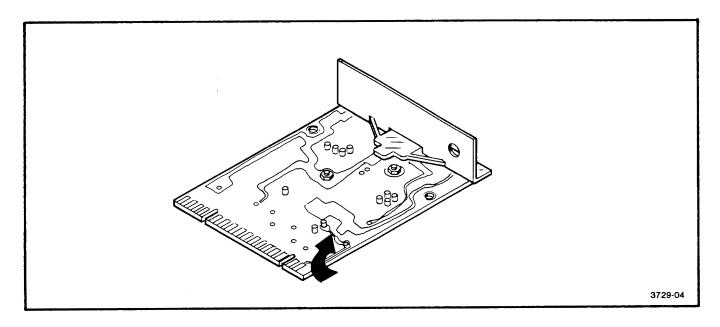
Breakpoint for collector sweep Kelvin sensing run. The solder pad is to the left on the run.
